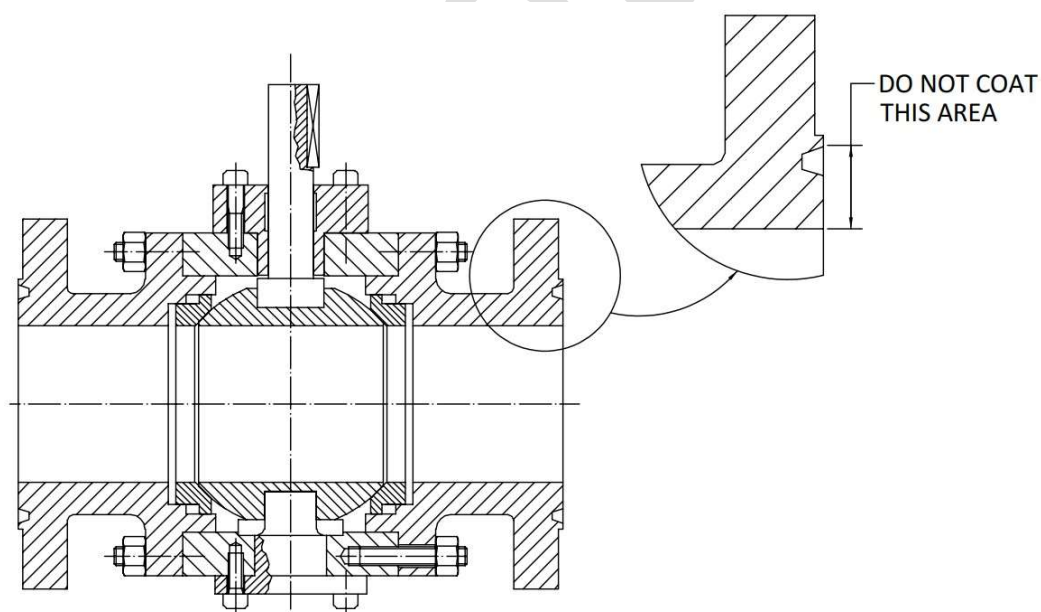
Ring Type Joint or Raised Face Ring Type Joint
